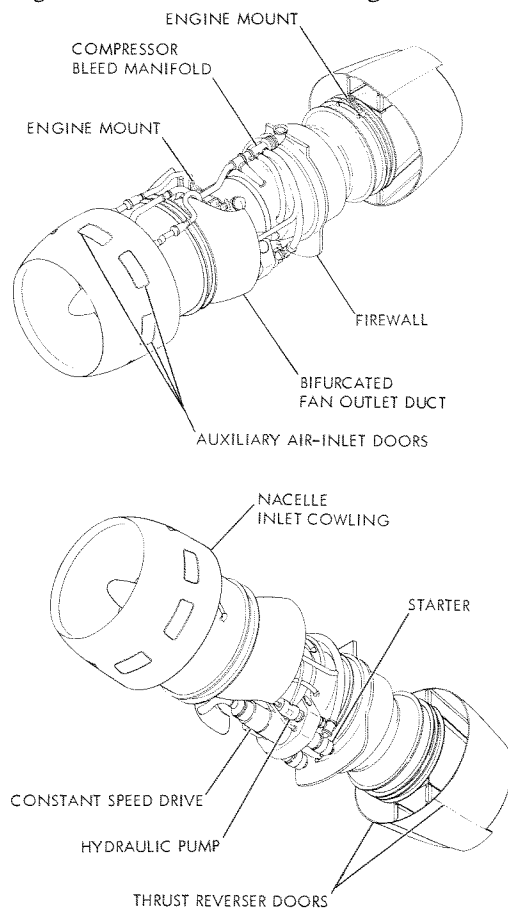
ENGINE QEC, PRATT AND WHITNEY JT3D-4 ENGINE.
